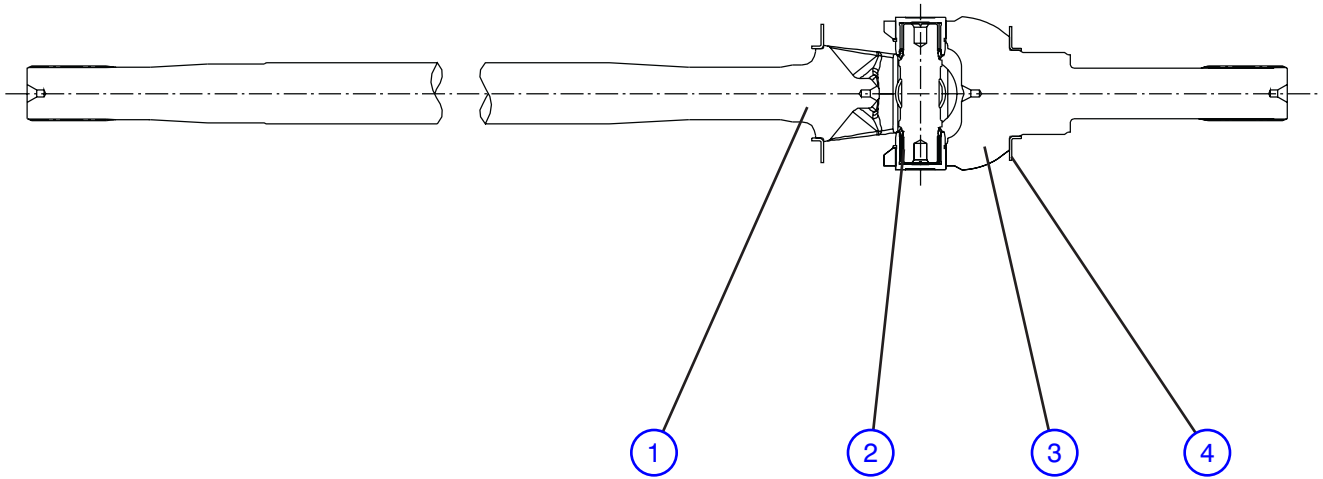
Front & Rear Axle (Wheel Hub Assembly) - All Wheel Drive Option (Cushman Axles)
